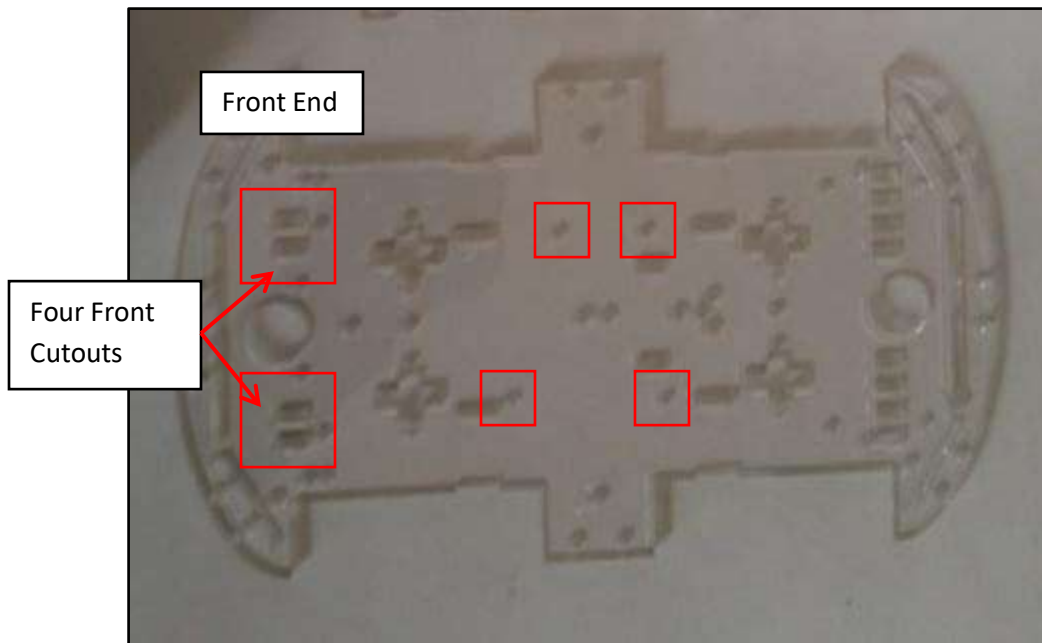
Chassis Top Plate with Arduino Mount Holes Marked
